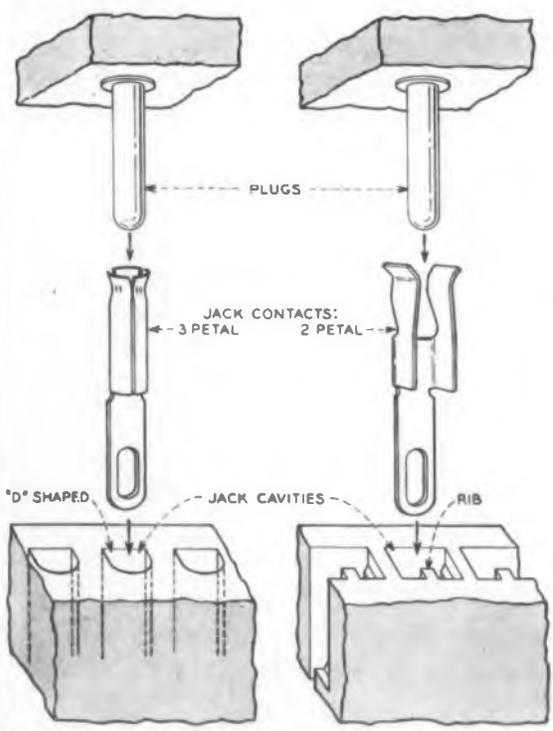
Large-scale drawing showing details of jack contacts and jack cavity structures for old and new types of multiple-contact connectors.
